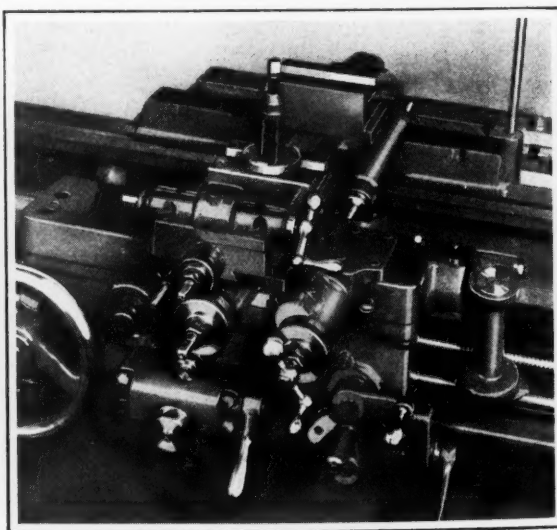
Arrangement in which the Rear Tool-block is Equipped with a Separate Adjusting Screw
